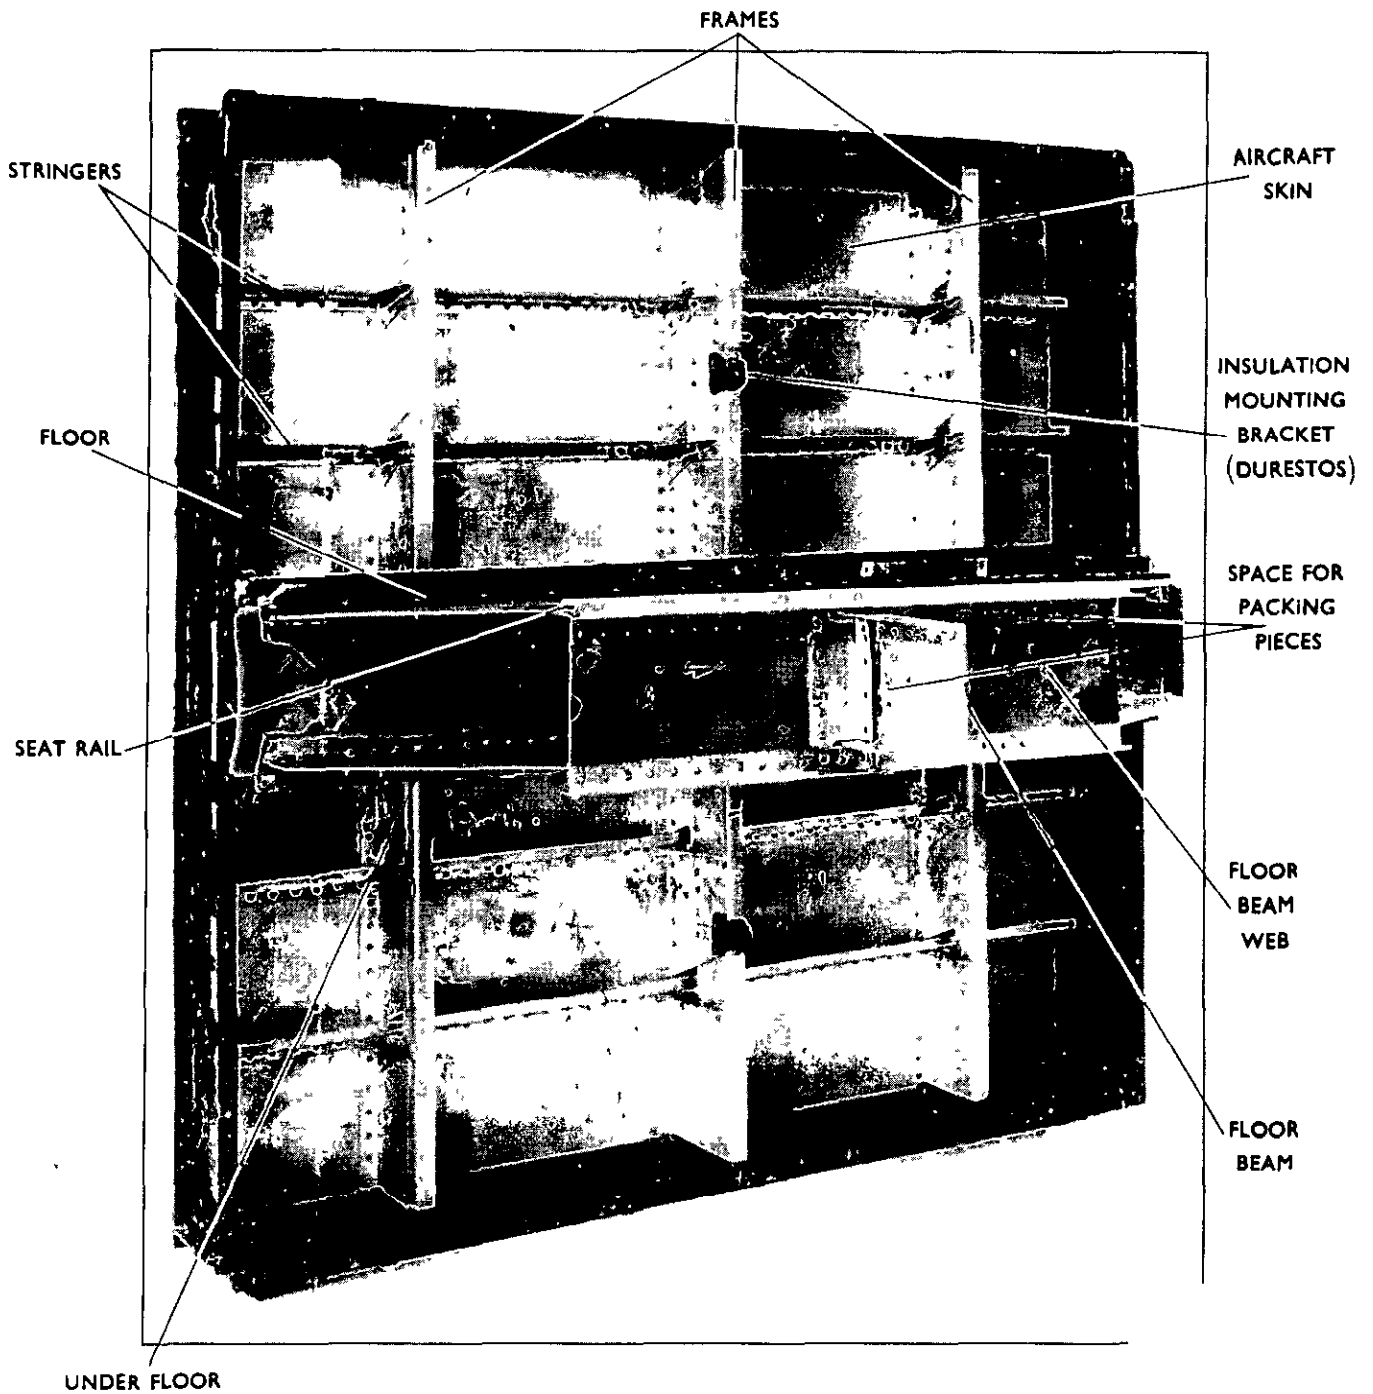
BRISTOL 198 (FLOOR BEAM) PANEL 6
